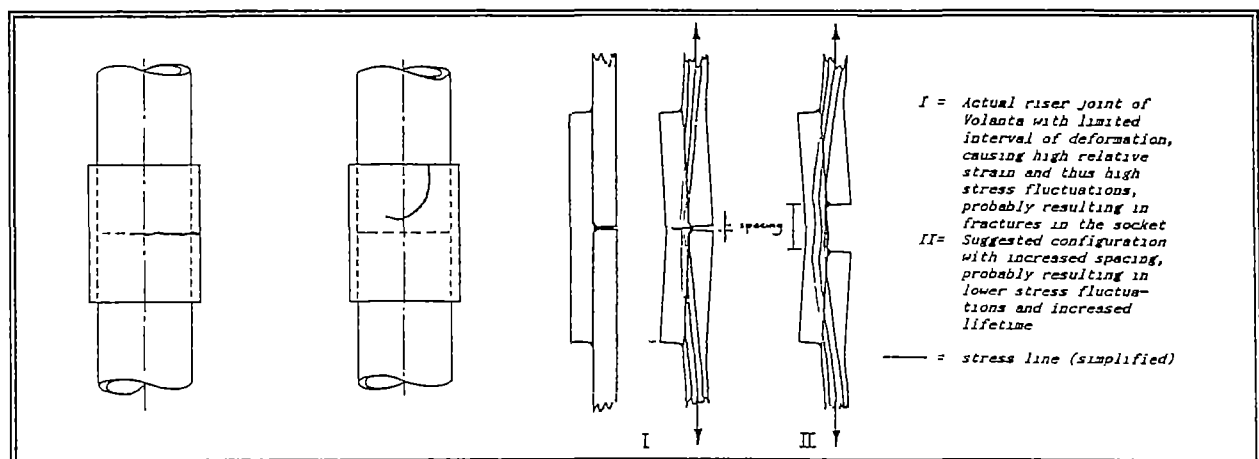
Fractures in the cemented riser joint of the Volanta, occurring at deep installation (Besselink,1990).
